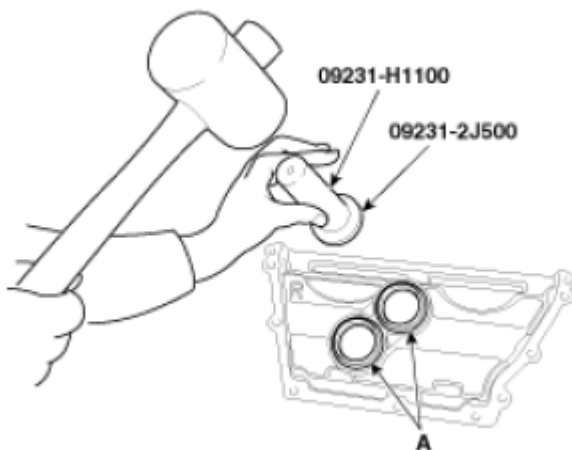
Installing Timing Chain Upper Cover Oil Seal Using SST (09231-2J500, 09231-H1100)
